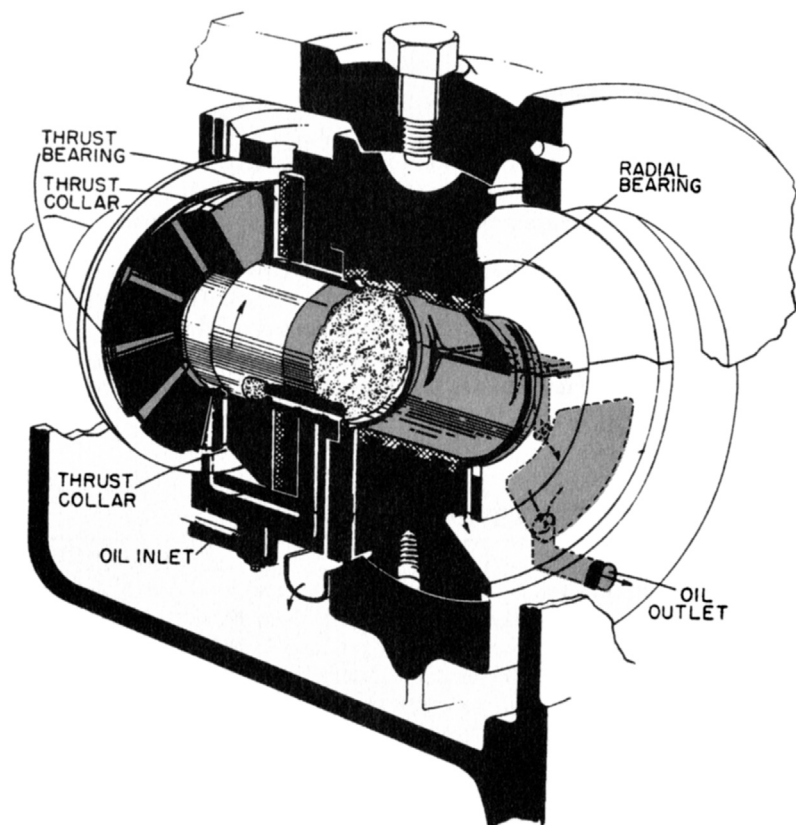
A-26 Combined journal and tilting-pad thrust bearing. A rigid collar on the shaft is held centered between the stationary thrust ring and a second stationary thrust ring (not shown) by two rows of tilting pads [3-3].
